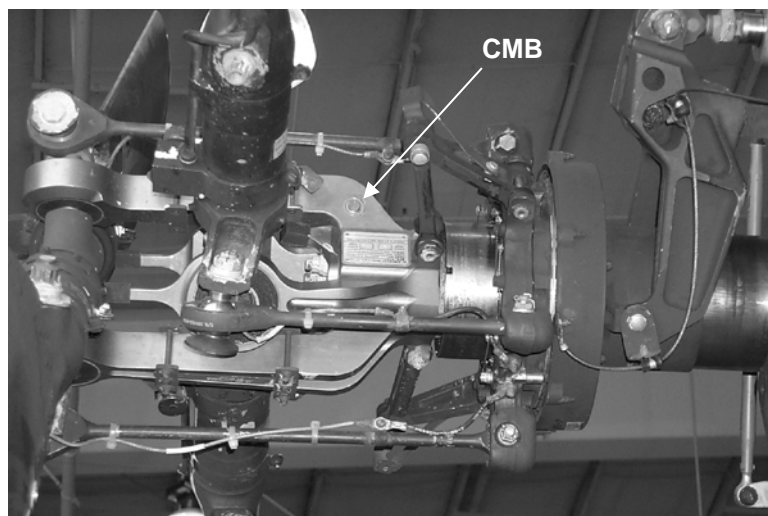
Tail Rotor Head Assembly (AH-64A/D) with CMB Installed
